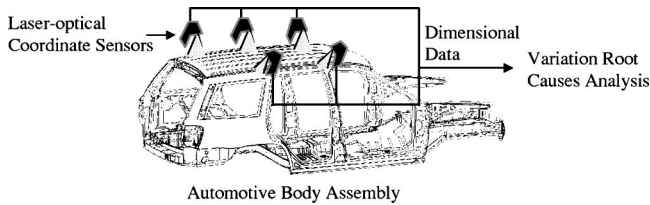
Optical coordinate measuring machine for automotive body assembly
